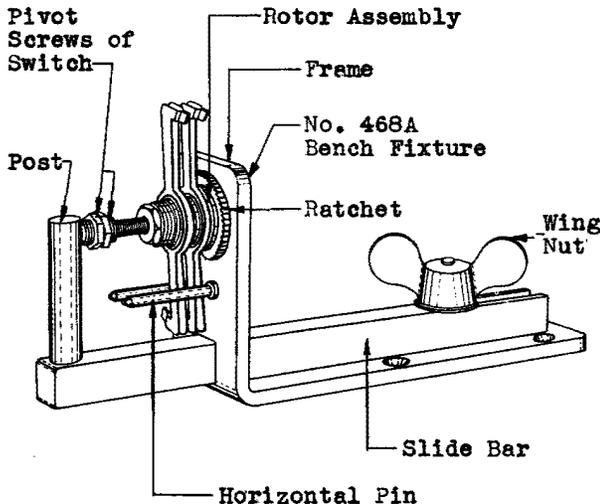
Mounting Solid Shaft Rotor Assembly of Switches
